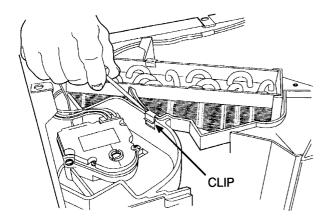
Clip Securing Bunk Blend-Door Assembly to Cab Blend-Door Assembly
